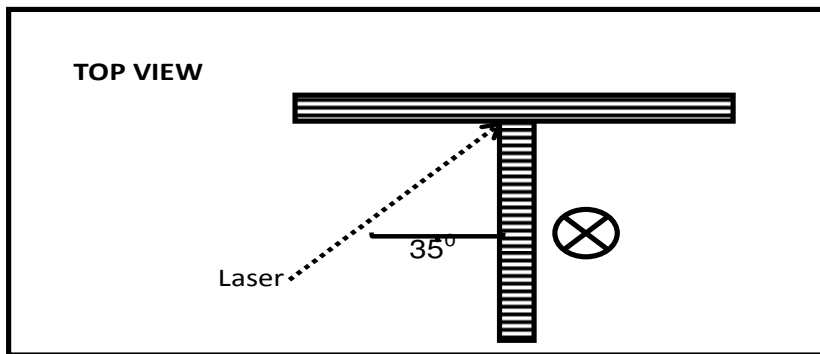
Vertical positions (top view) of t-joint hybrid laser arc welding.
